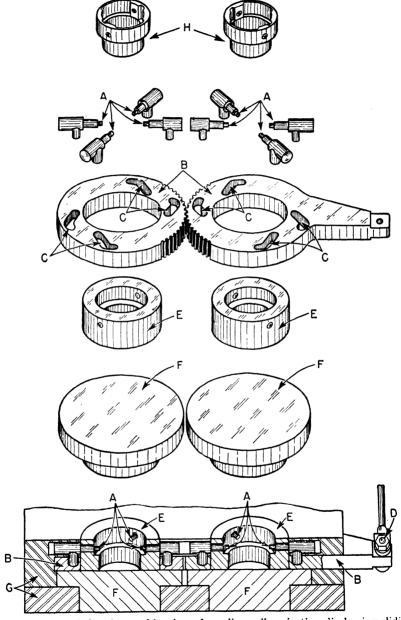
Exploded and assembly view of a spline-collar ejection die having sliding cores that are moved in different directions at the same time through the use of cam plates.
